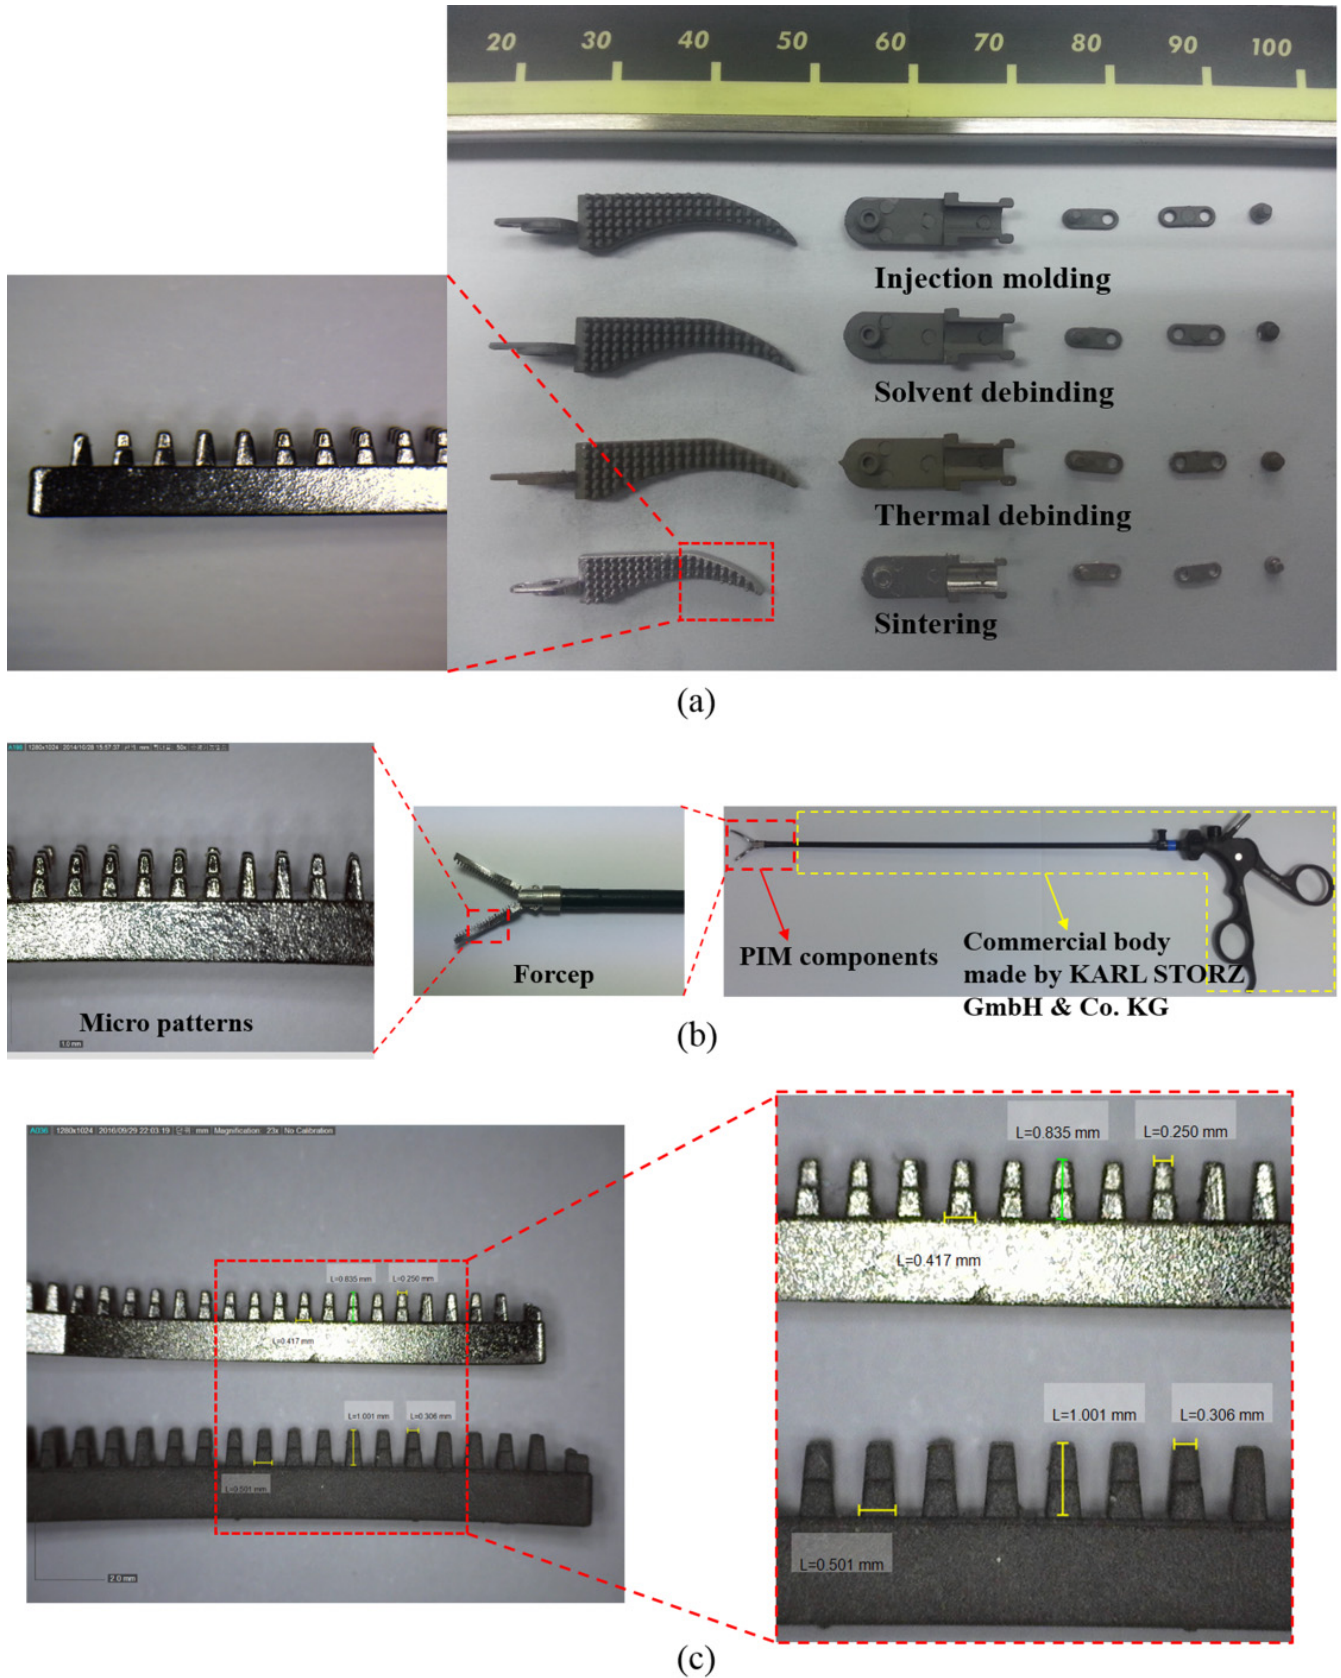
(a) Injection molded, debound, and sintered components, (b) assembled components, (c) injection molded and sintered forceps
